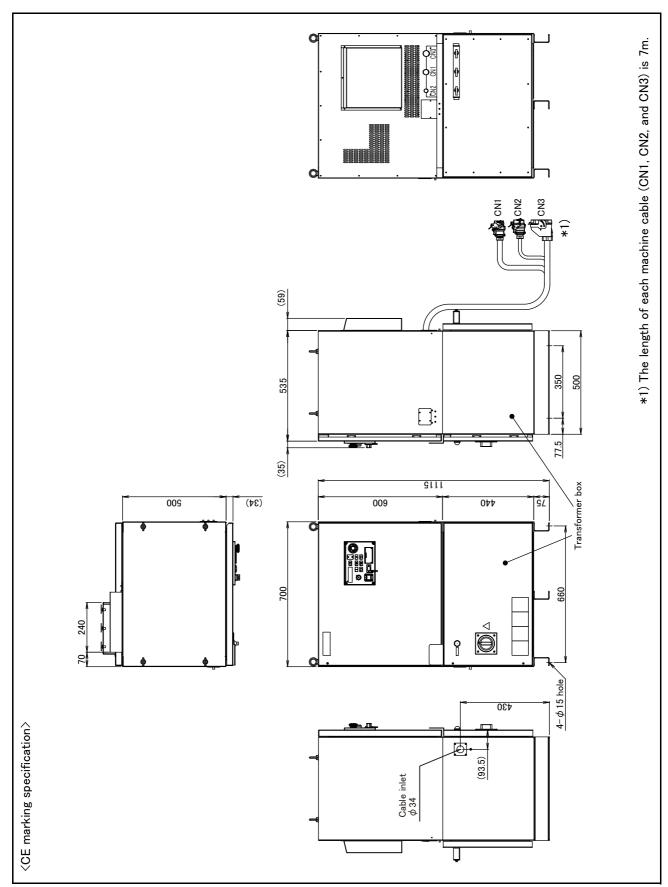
Outside dimensions of drive unit (CR760 CE marking)
